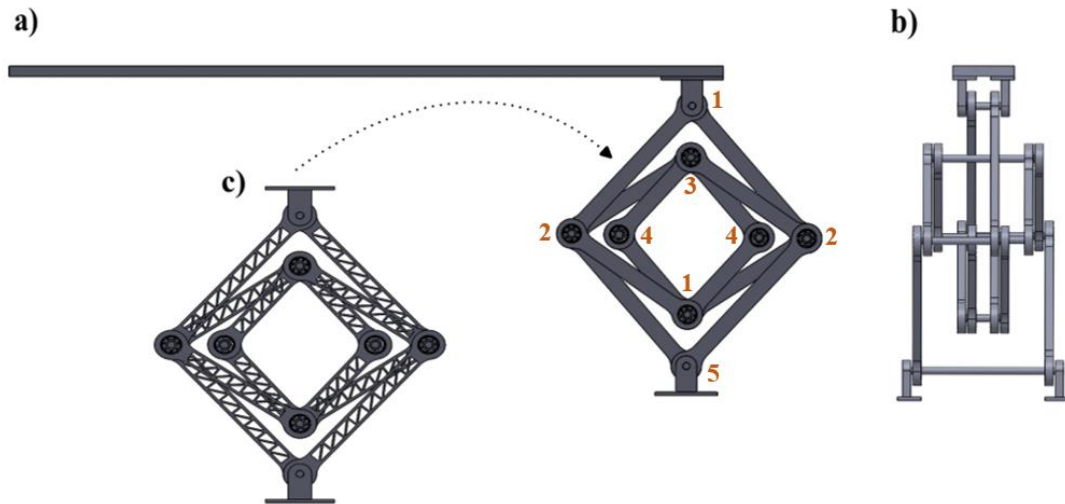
a) A front view CAD assembly model of the nested IA affixed to a cantilever beam. b) A side view CAD assembly model of the nested IA. c) A front view CAD assembly model of the nested truss IA.
